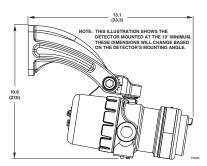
Q9033 Mounting Arm without Collar Attachment Dimensions in Inches (cm) (See Figure 1 for Correct Detector Orientation.)
